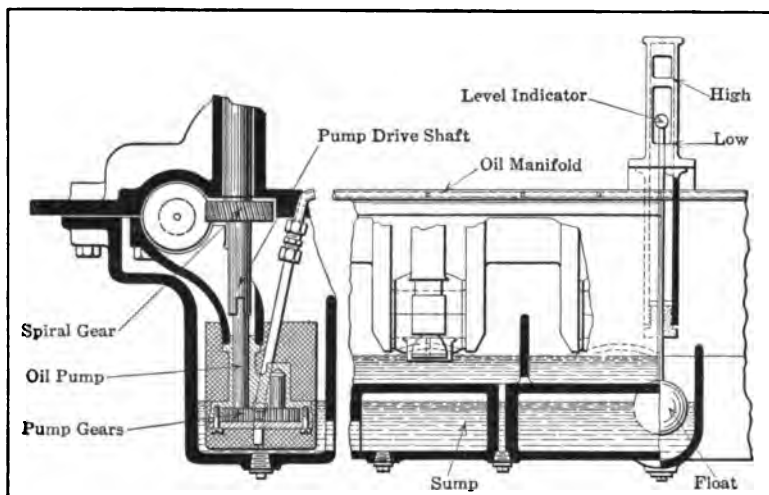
Sectional view of part of Rutenber engine, depicting method of driving oil pump and distribution to bearing points.
